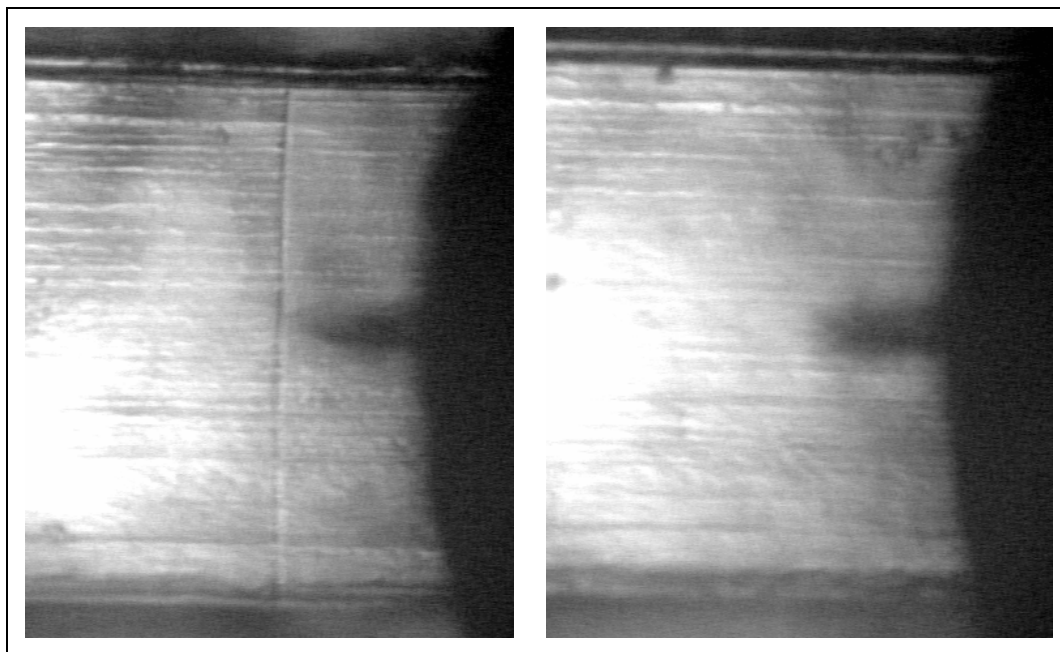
Elimination of weld line for the tensile specimen using RHCM.
